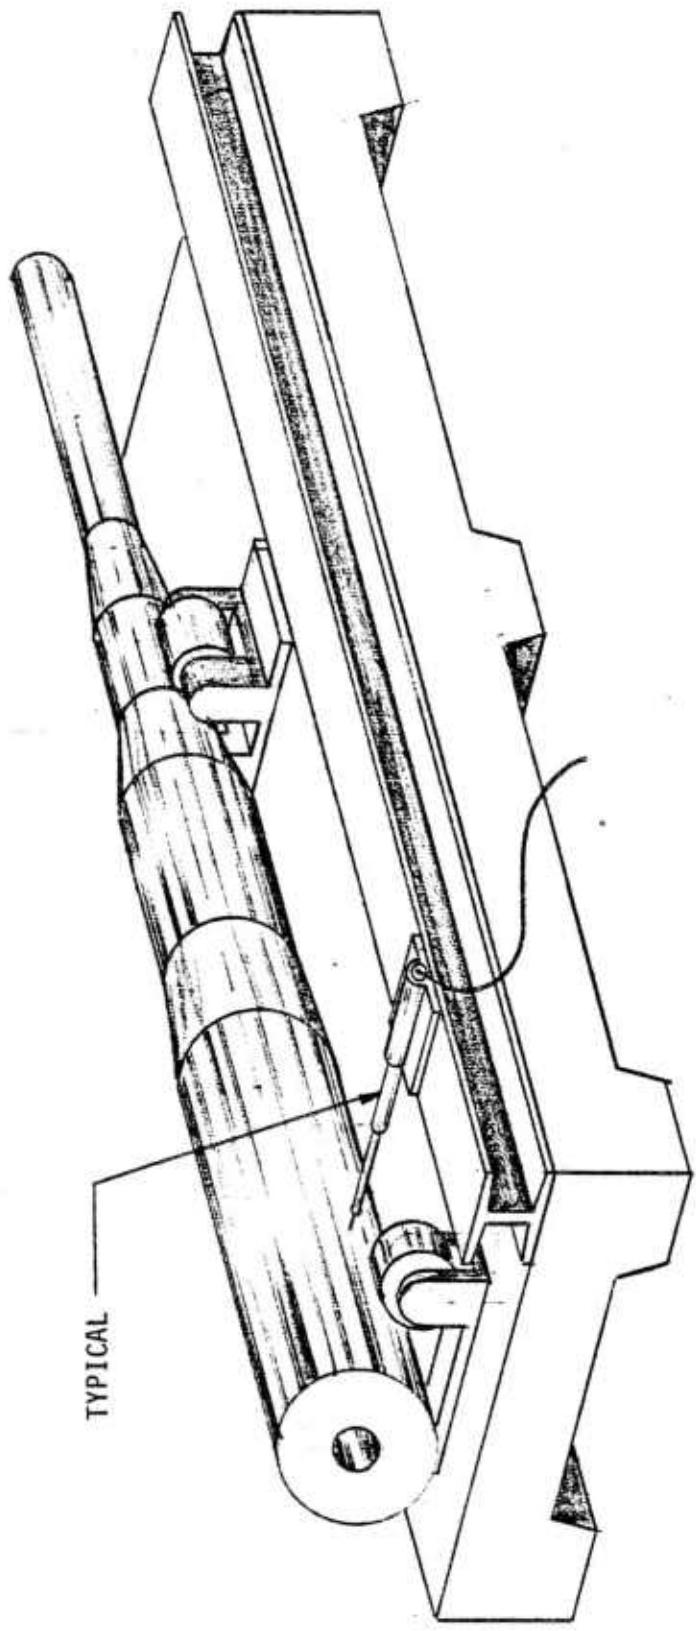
O.D. MEASUREMENT TRANSDUCER
